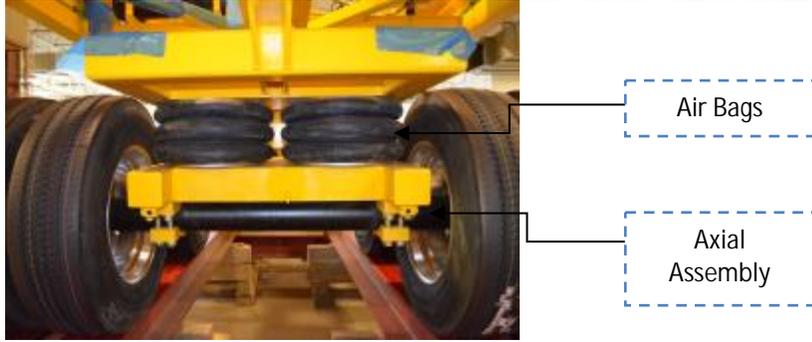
End View of the Lower Carriage Assembly Showing the Axle and Air Bags.
